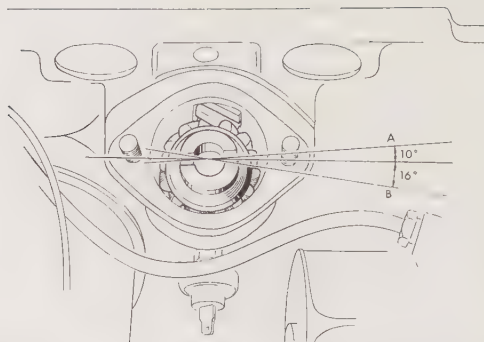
48 Position of distributor drive slot at tdc of No. 1 piston, 'Spitfire' engine, using angle B.
